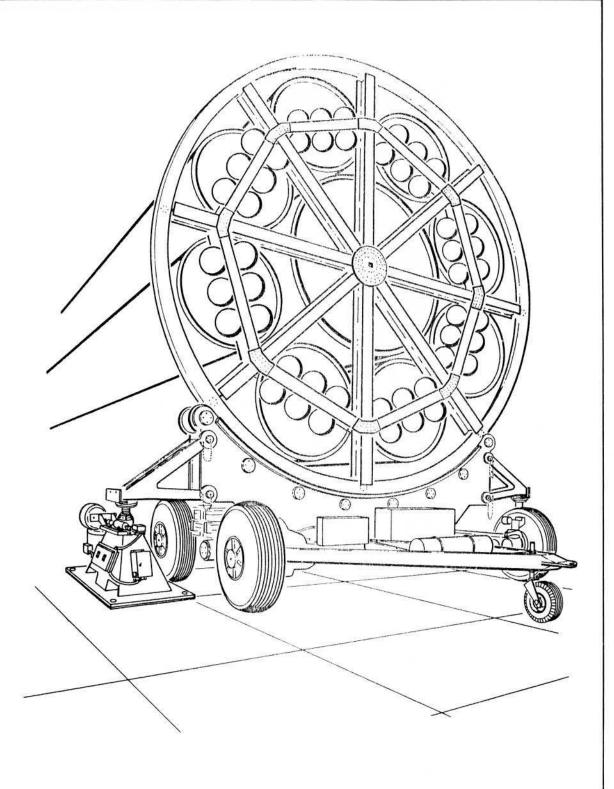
JACK ASSEMBLY UNDER JACK PAD
